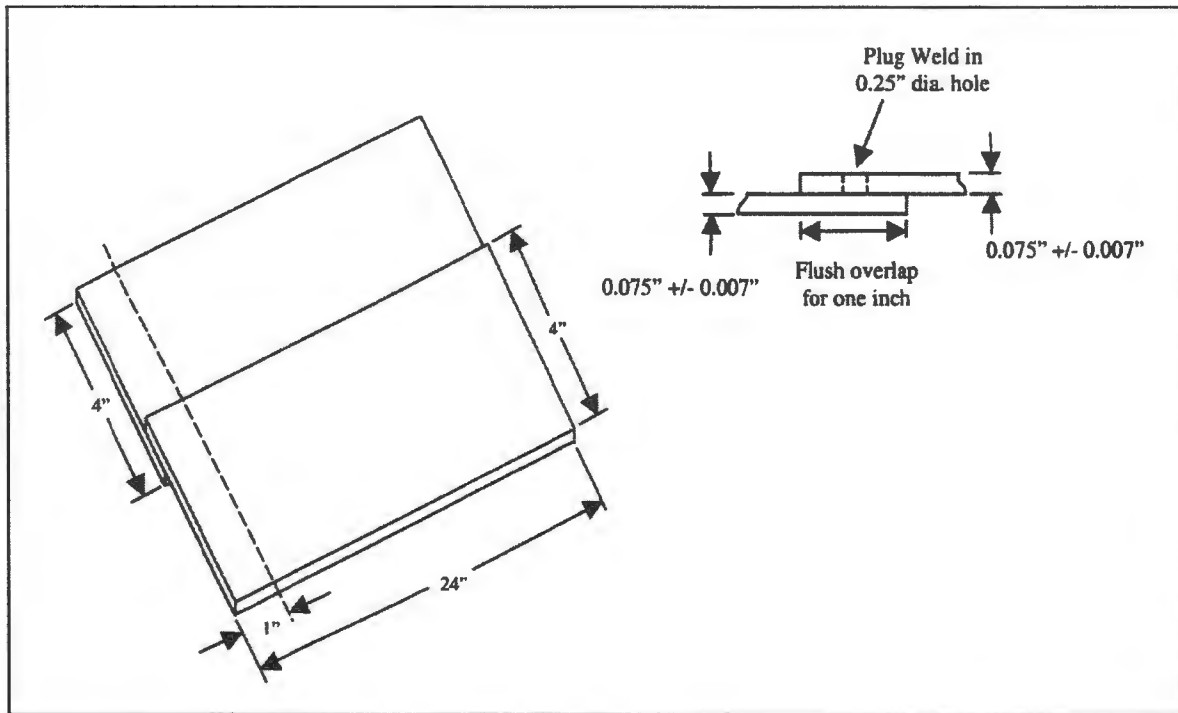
Schematic illustrating dimensions of plug weld assembly.
